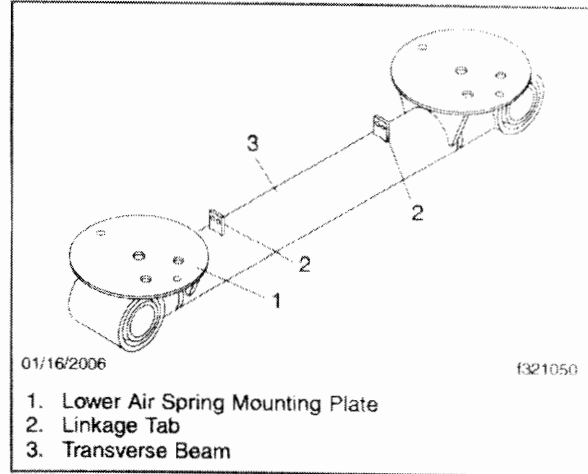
, Holland Neway Ad Series Suspension Assembly
